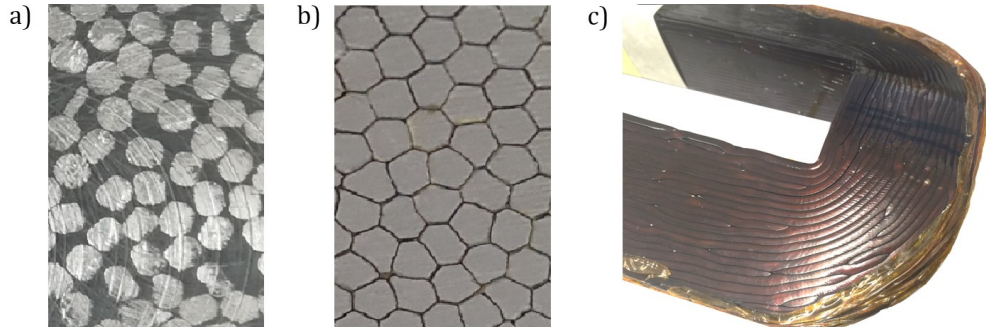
Impregnated winding samples, a) Close-up view on a conventional winding ($FF=55\%$), b) Close-up view on a compressed winding ($FF=80\%$) [216], c) A pre-compressed coil exemplar [216]
